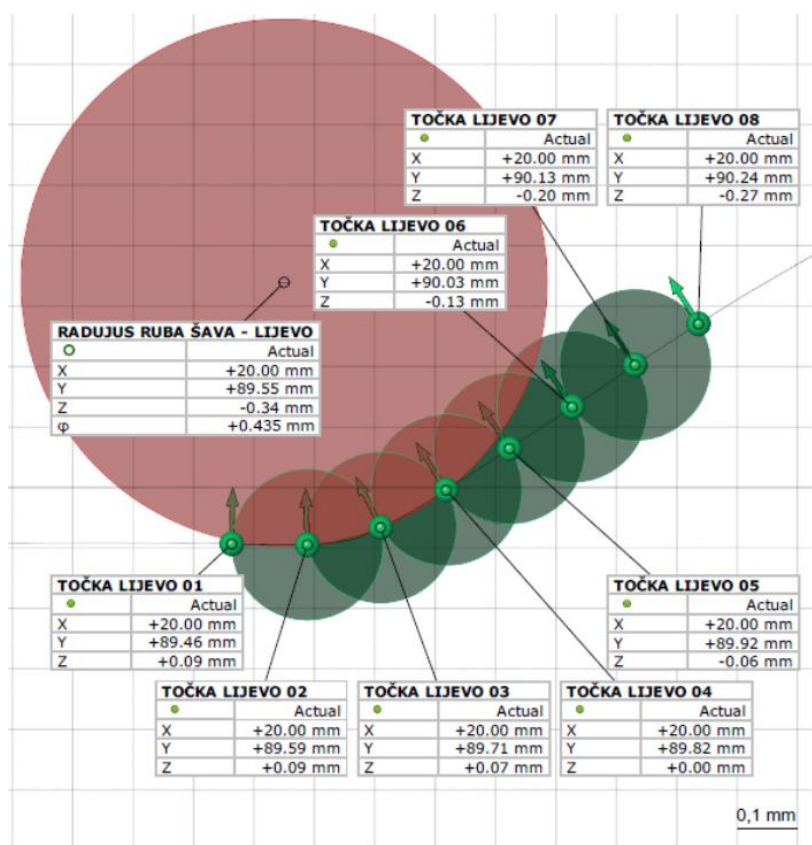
Weld toe radius in *GOM Inspect
